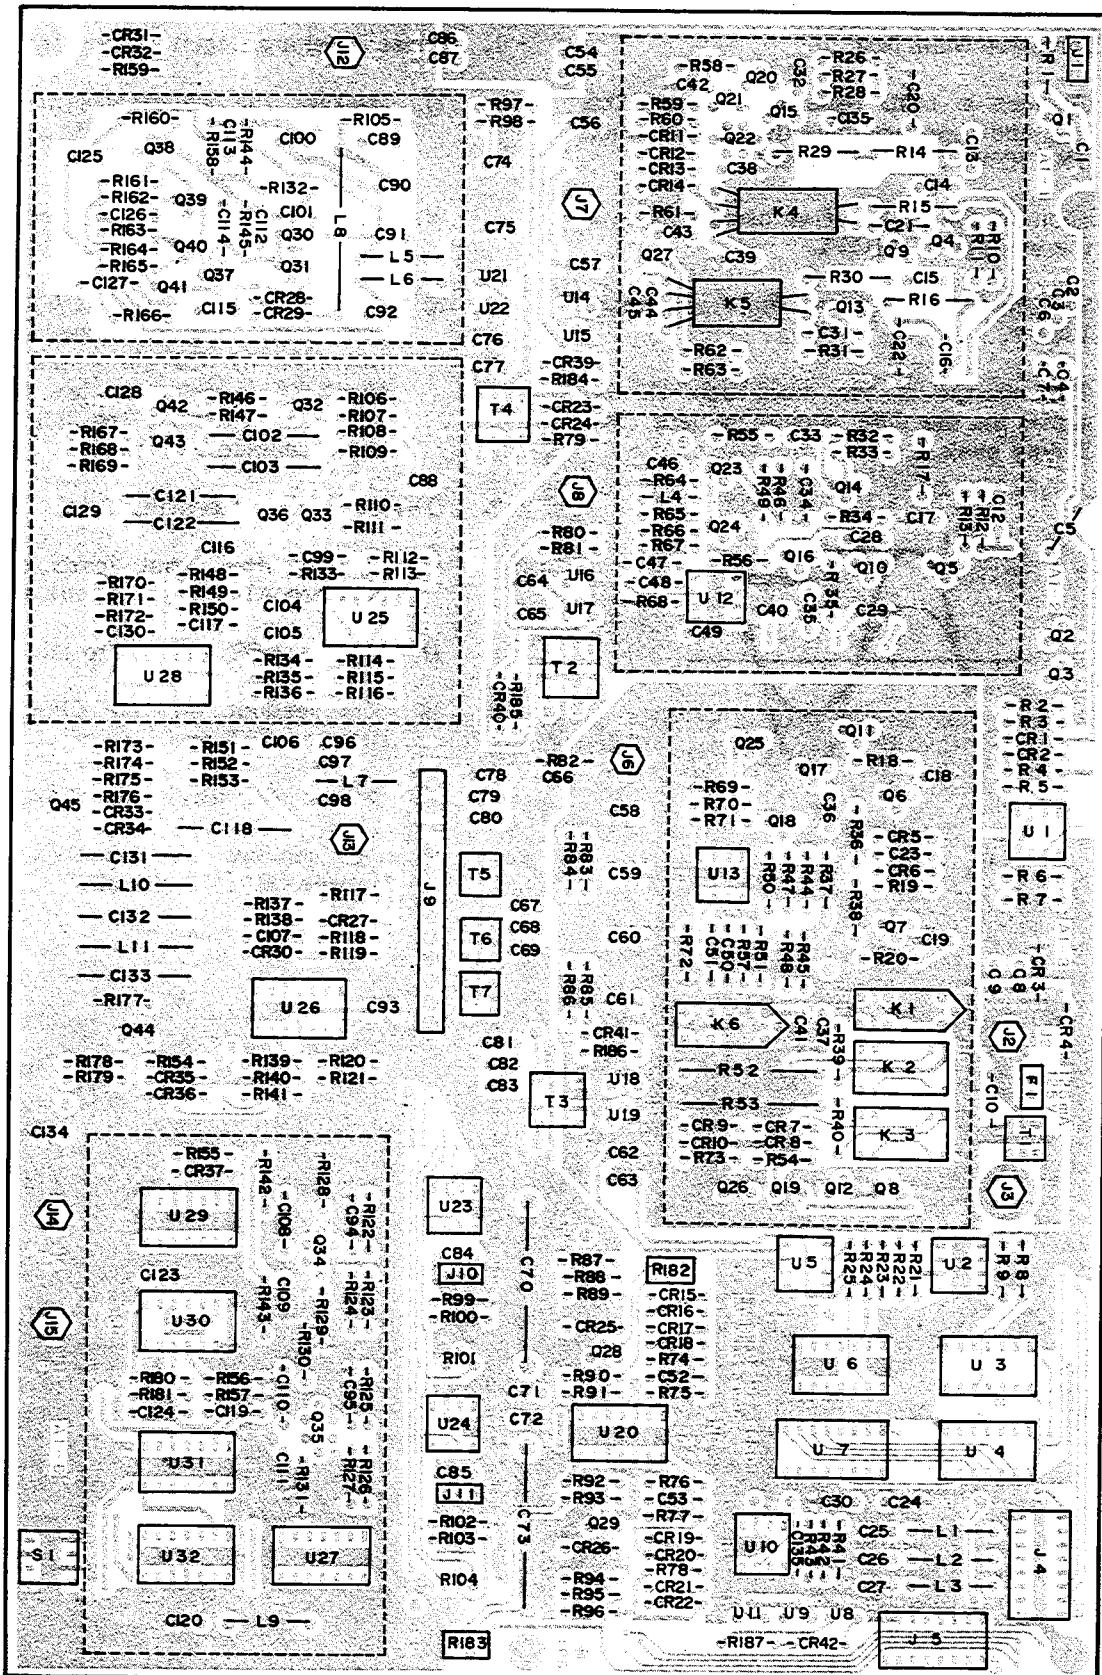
A1 Range Resistor/Null Detector Board Assembly Component Locations
